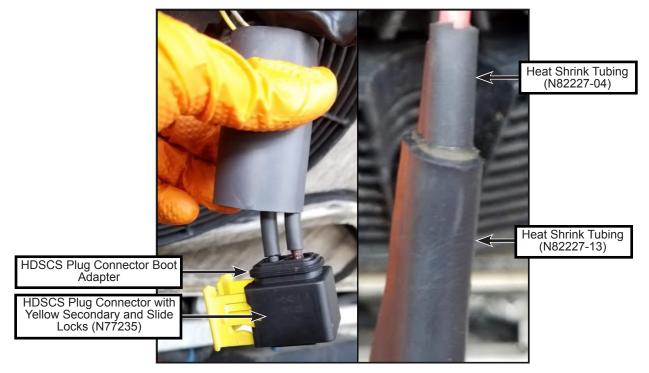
Heat Shrink Tubing Installation on HDSCS Plug Connector Wiring at Fan Side
